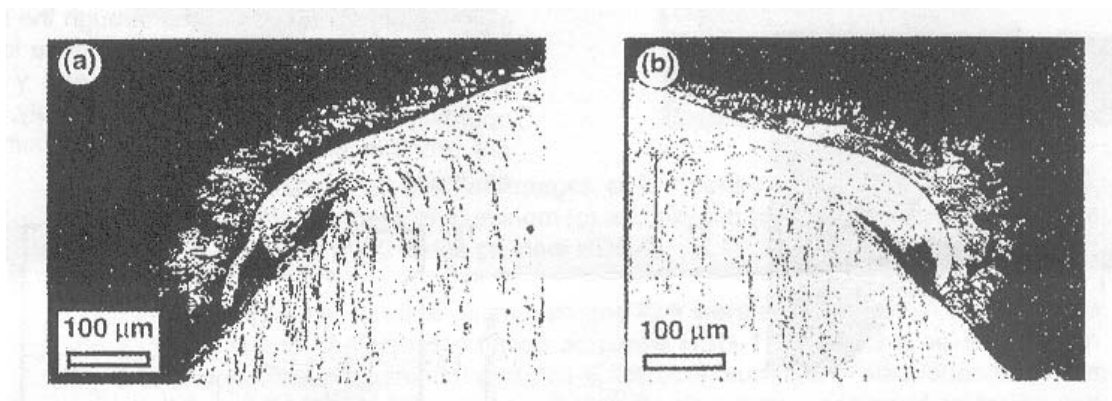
Severe macro-deformation or mushrooming on a truncated cone electrode. Optical micrographs of electrodes tested to a) 1000 welds and b) 2000 welds on steel HDG-4 [50].
